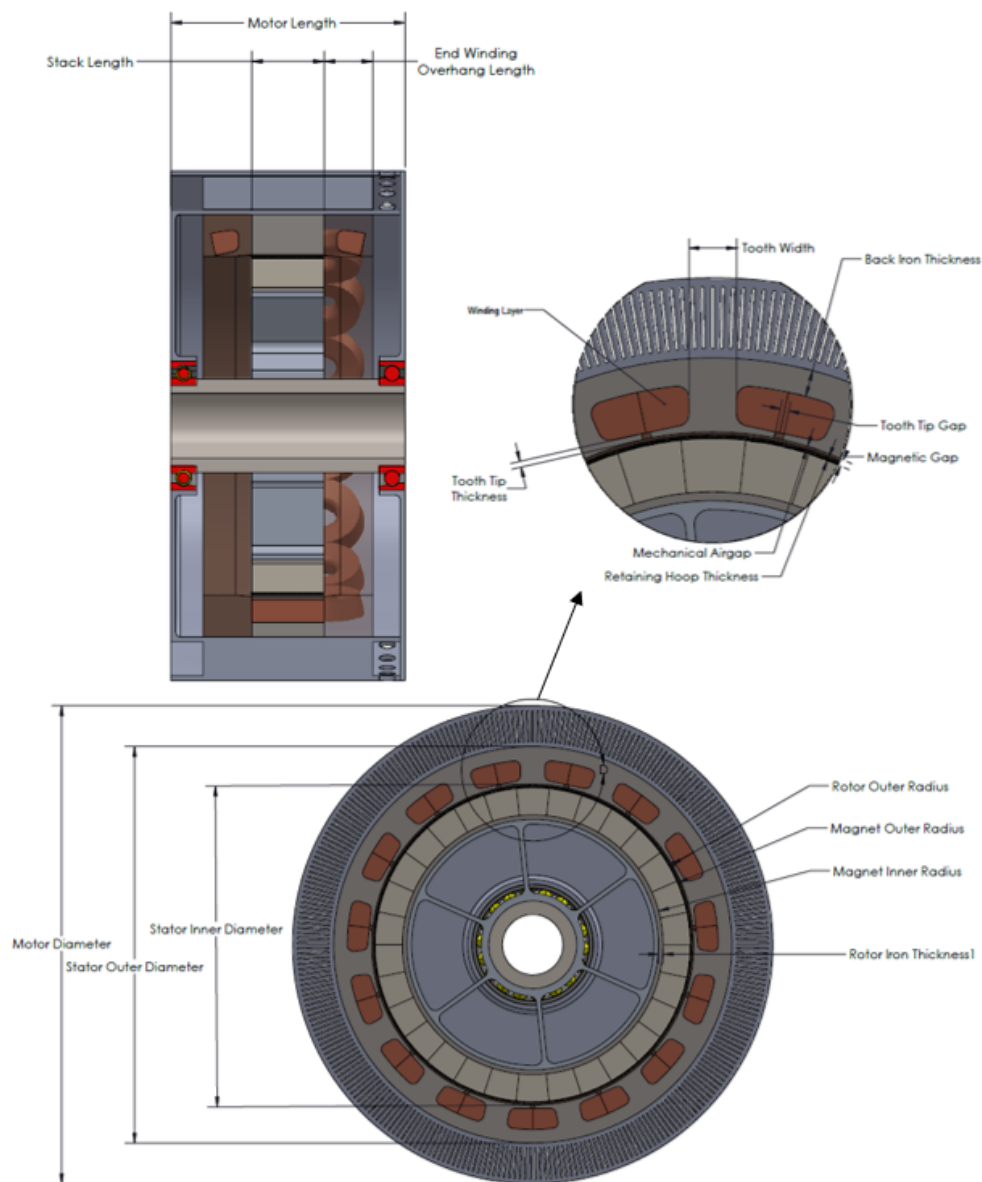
Example Geometry for a Halbach array permanent magnet inner rotor machine. Definitions of various geometric parameters defining a machine are provided.
